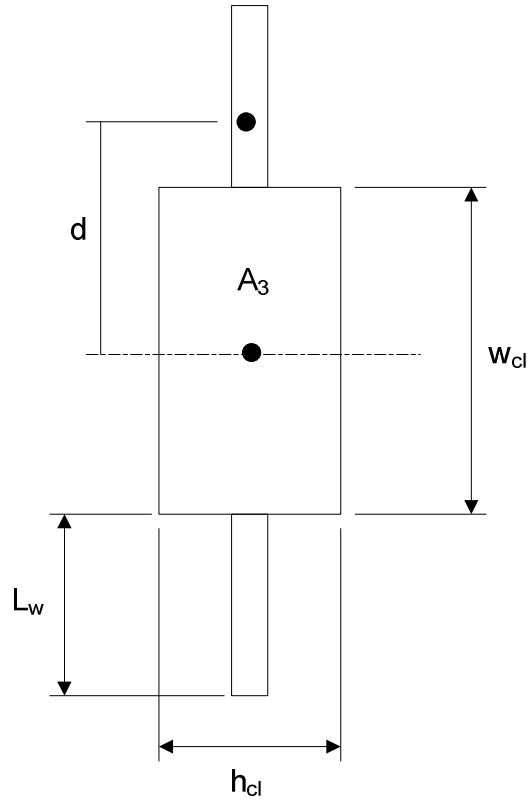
Cross section of upper pivot clamp between cavity and stub shaft ends showing dimensions used in calculations
